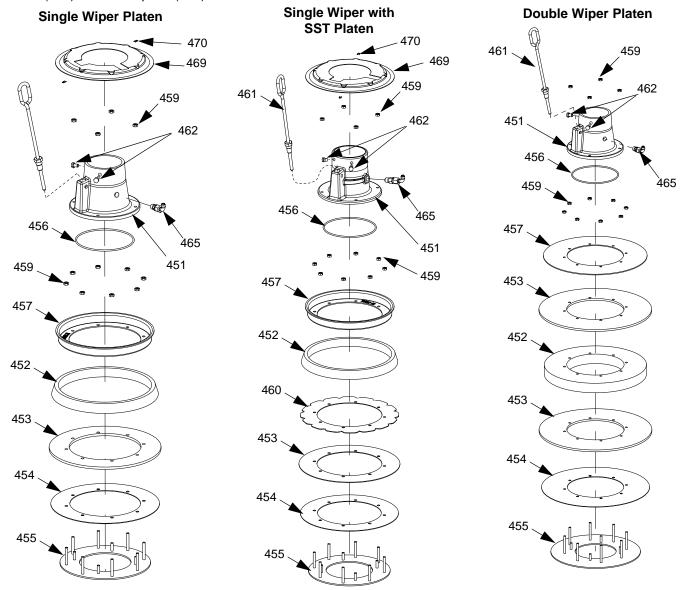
60 Liter (16 Gallon) Single and Double Wiper Assemblies
